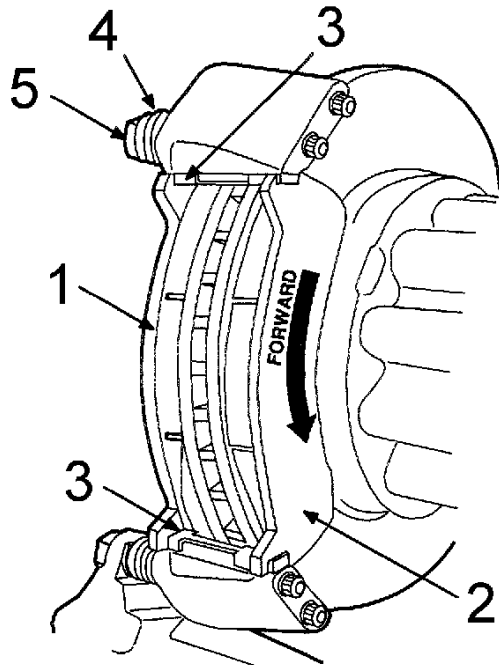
Rotate Caliper Open About Lower Hex Mounting Bolt and Guide Pin
